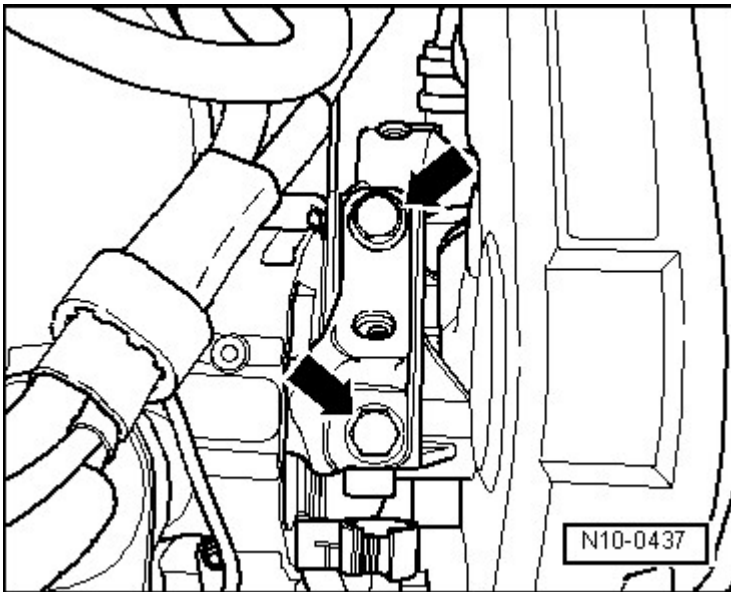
Identifying Mounting Bolts Of Subframe Mount/Engine Bracket
